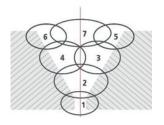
Order of the layers in a multi-layer single-V butt weld.
